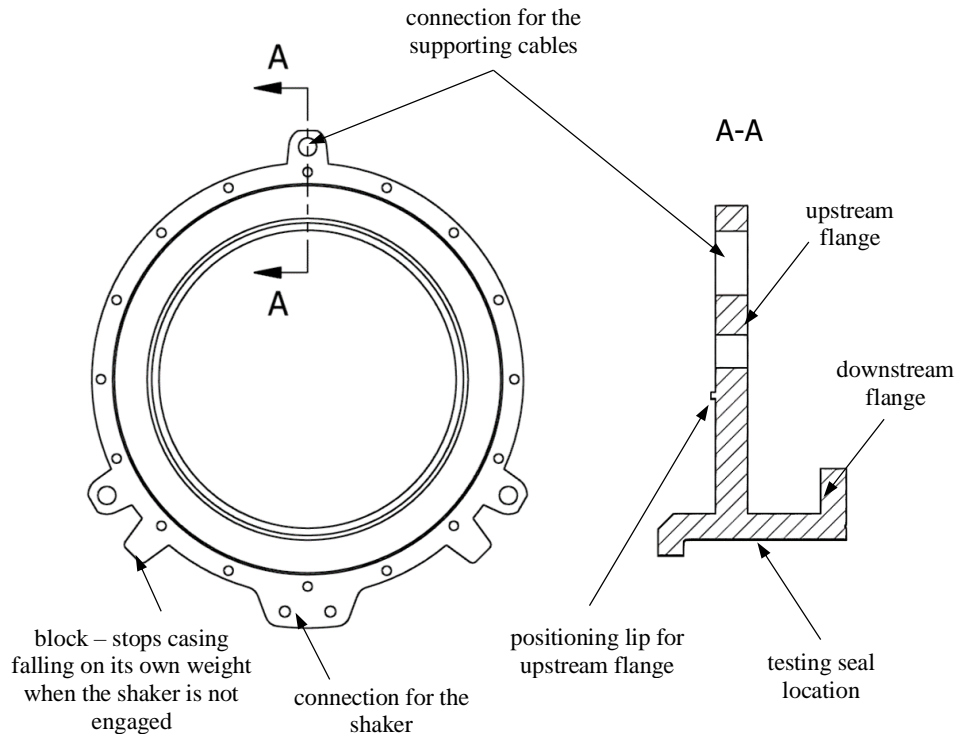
Front view and cross section of the testing seal fitting part of the casing.
